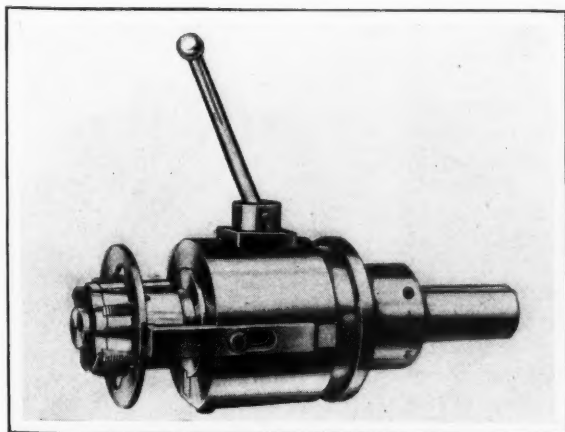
Geometric Receding Chaser Tap for Cutting Taper Threads
